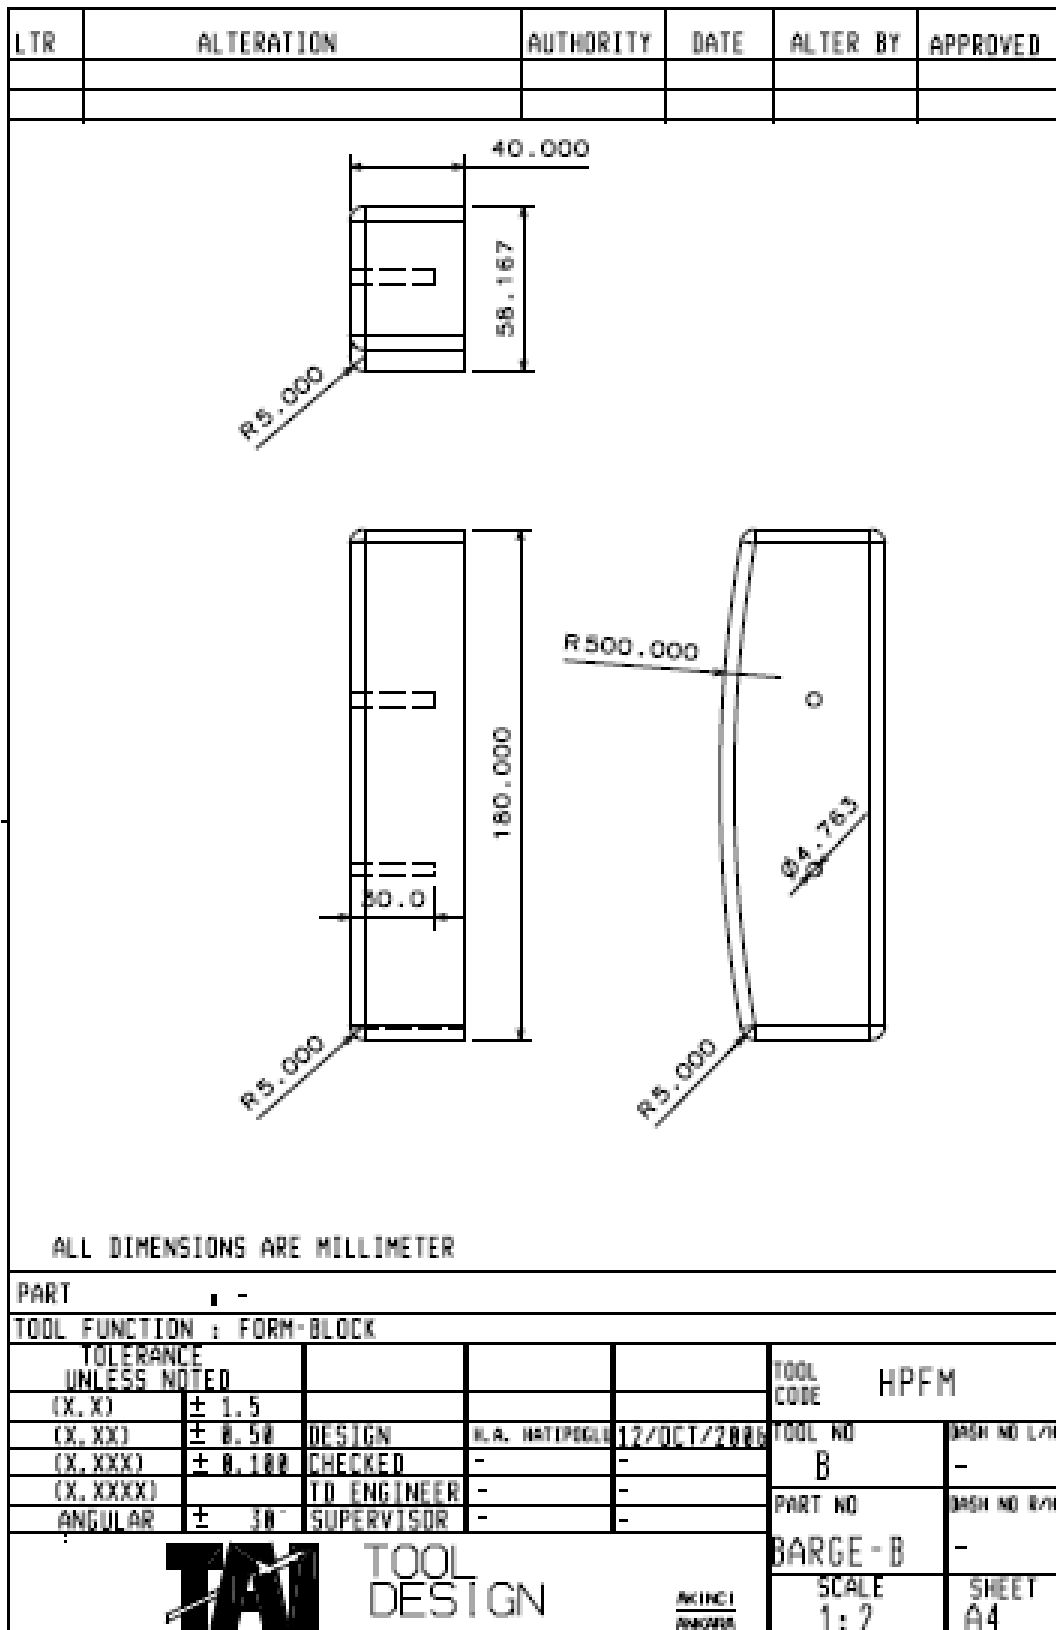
Technical drawing of the die used in the contoured flanging experiment.
